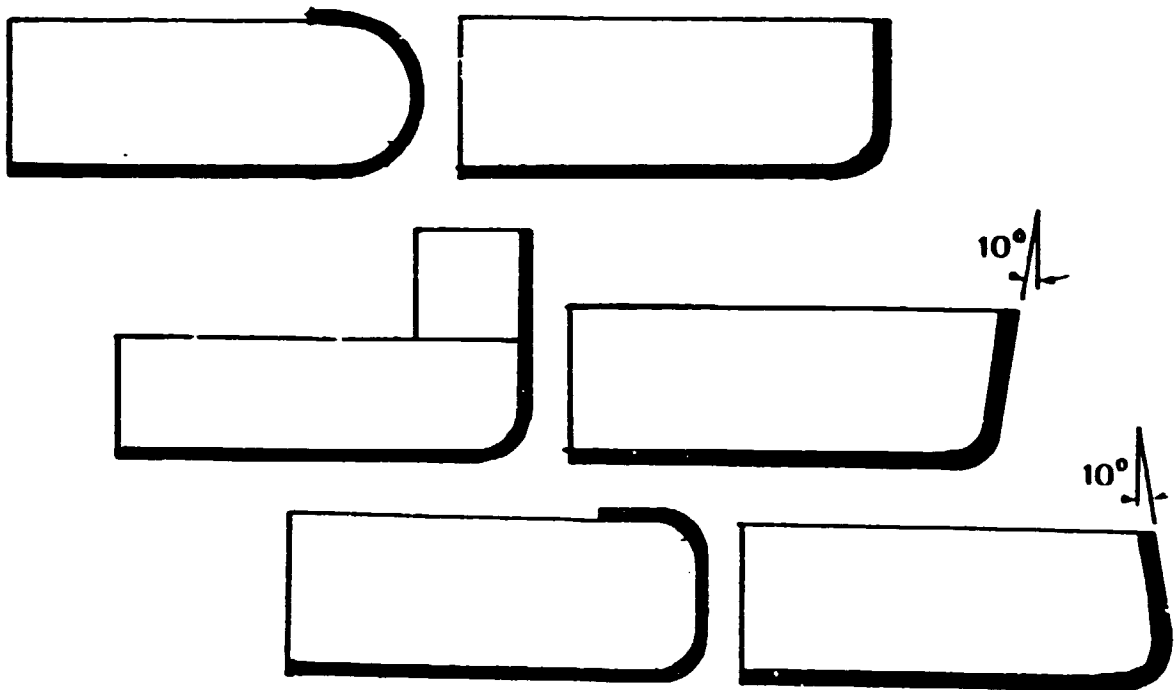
Examples of gluing which can be obtained by the postforming technique.
